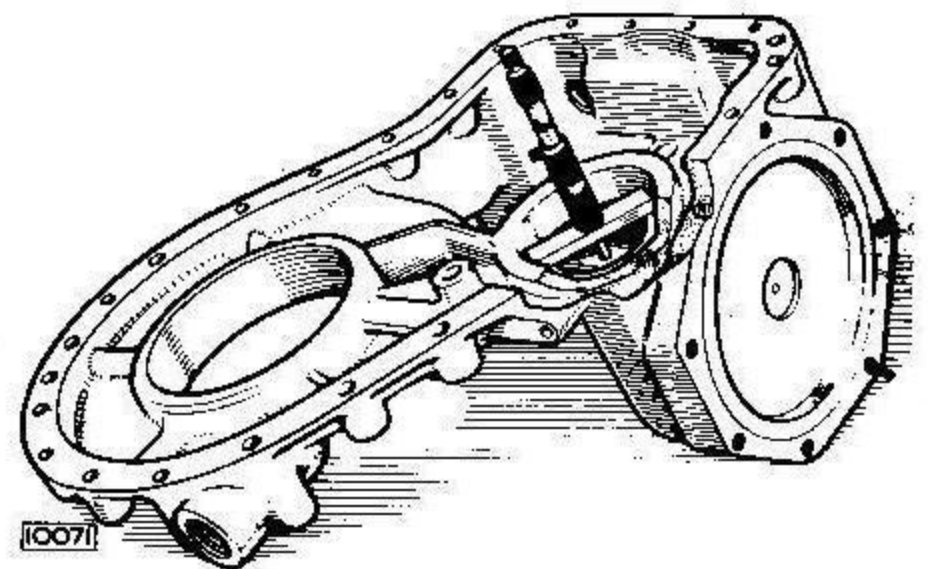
Checking the distance between the bottom face of the driving pinion housing and the centre of the output shaft bearing housing
